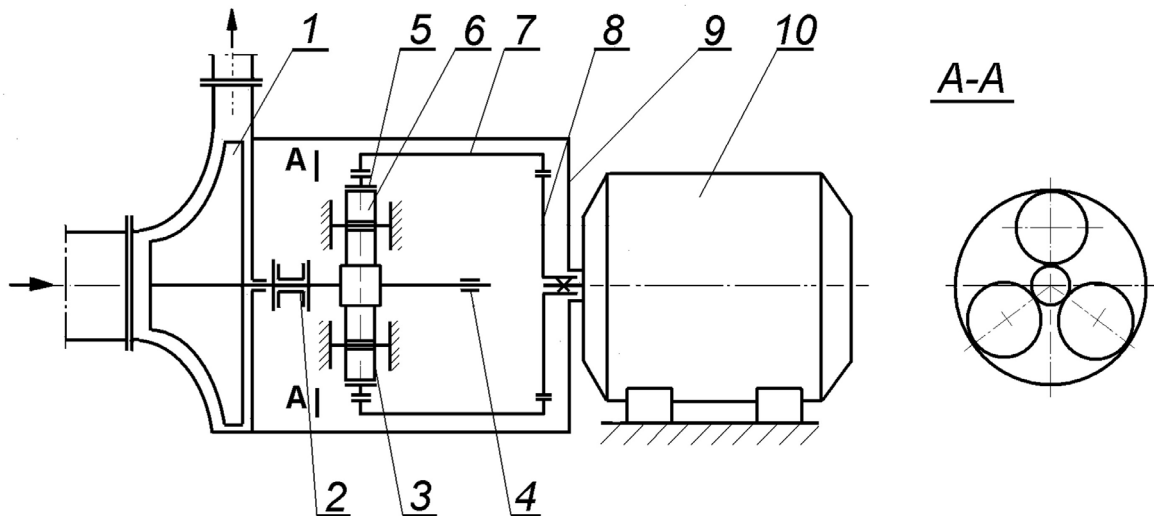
Lay-out of high speed compressor unit driven by electric motor: 1 – rotor with blades disk (18000 rpm), 2 – axial-radial bearing, 3 – satellite bearing (4-lobe fixed journal), 4 – radial bearing (4-lobe sleeve), 5 – toothed ring, 6 – satellite, 7 – toothed coupling, 8 – toothed disk, 9 – housing, 10 – electric motor
